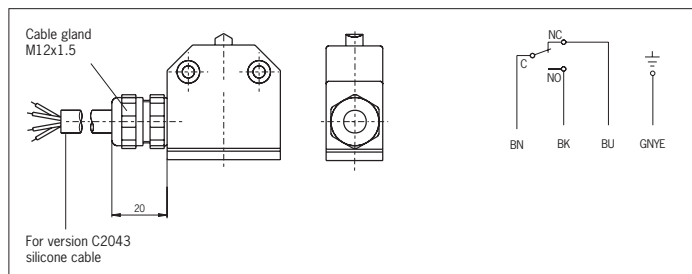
Dimension drawing/connection diagram of N01.550X... with connection cable (PUR cable, 4x0.5 mm²)
